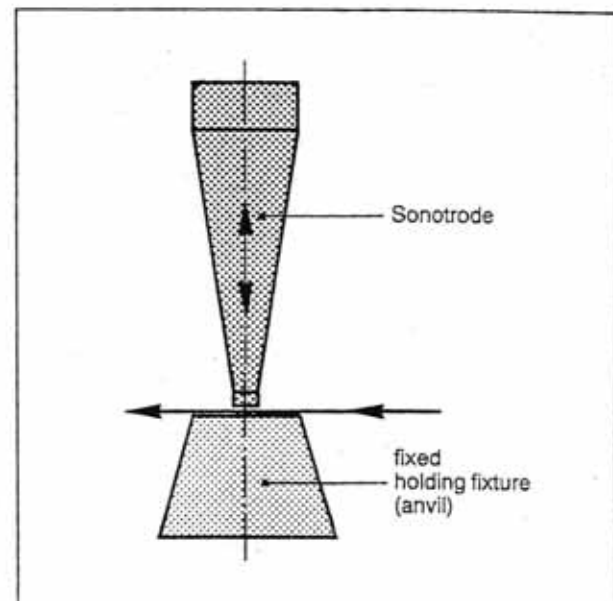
Ultrasonic seam welding, transport of sheeting only by traction of the foil.
